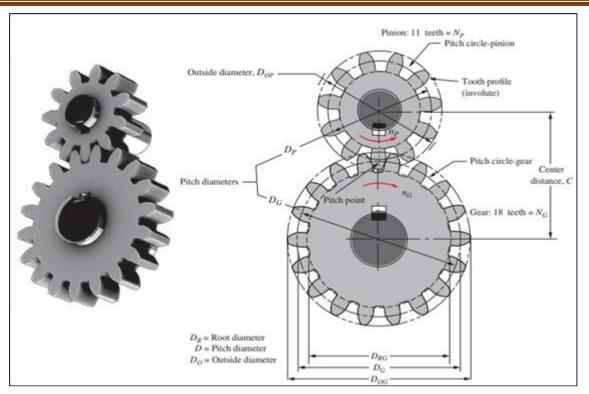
Pair of spur gears. The pinion drives the gear [1].
